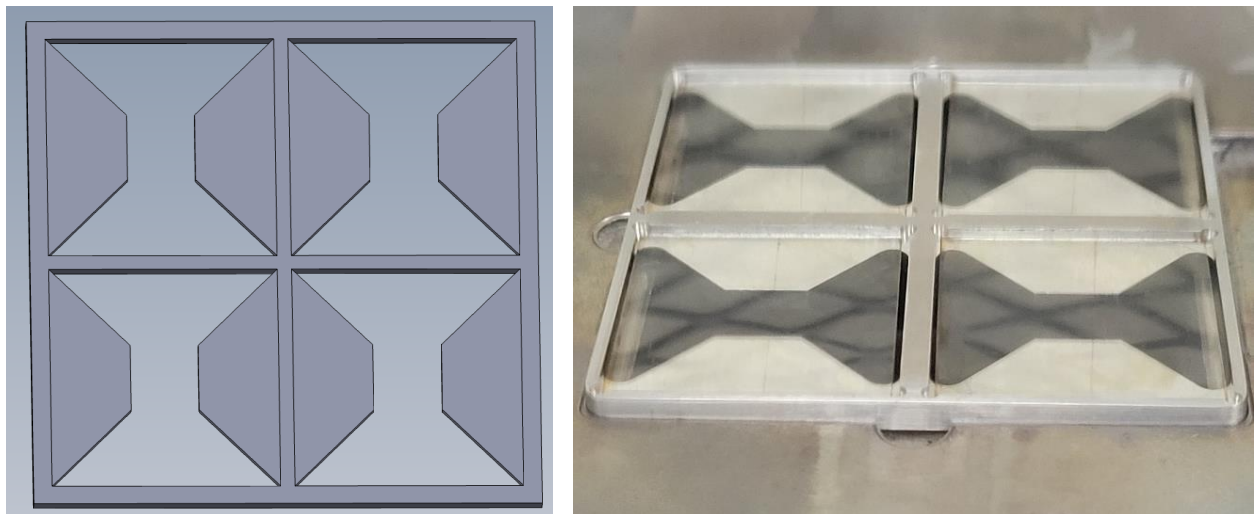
Solidworks schematic (left) and real image (right) of the custom slide holder. Each slot is 25.5 x 25.5 mm. The corners have been rounded off in the final product for ease-of-use. Real image shows the holder slotted into the evaporation chamber, with the work-surface pointed down towards the metal source.
